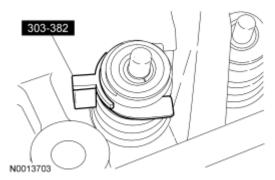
Compressing Valve Springs Courtesy of FORD MOTOR CO.
